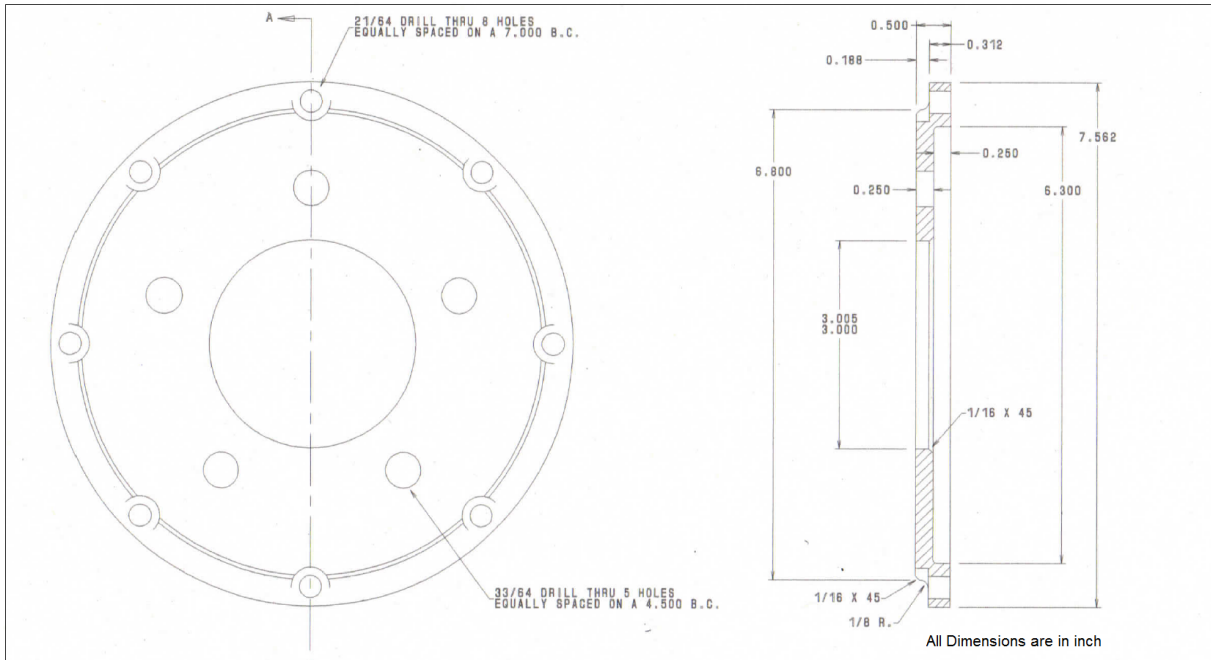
Brake Rotor Hat - Courtesy Coleman Racing.
